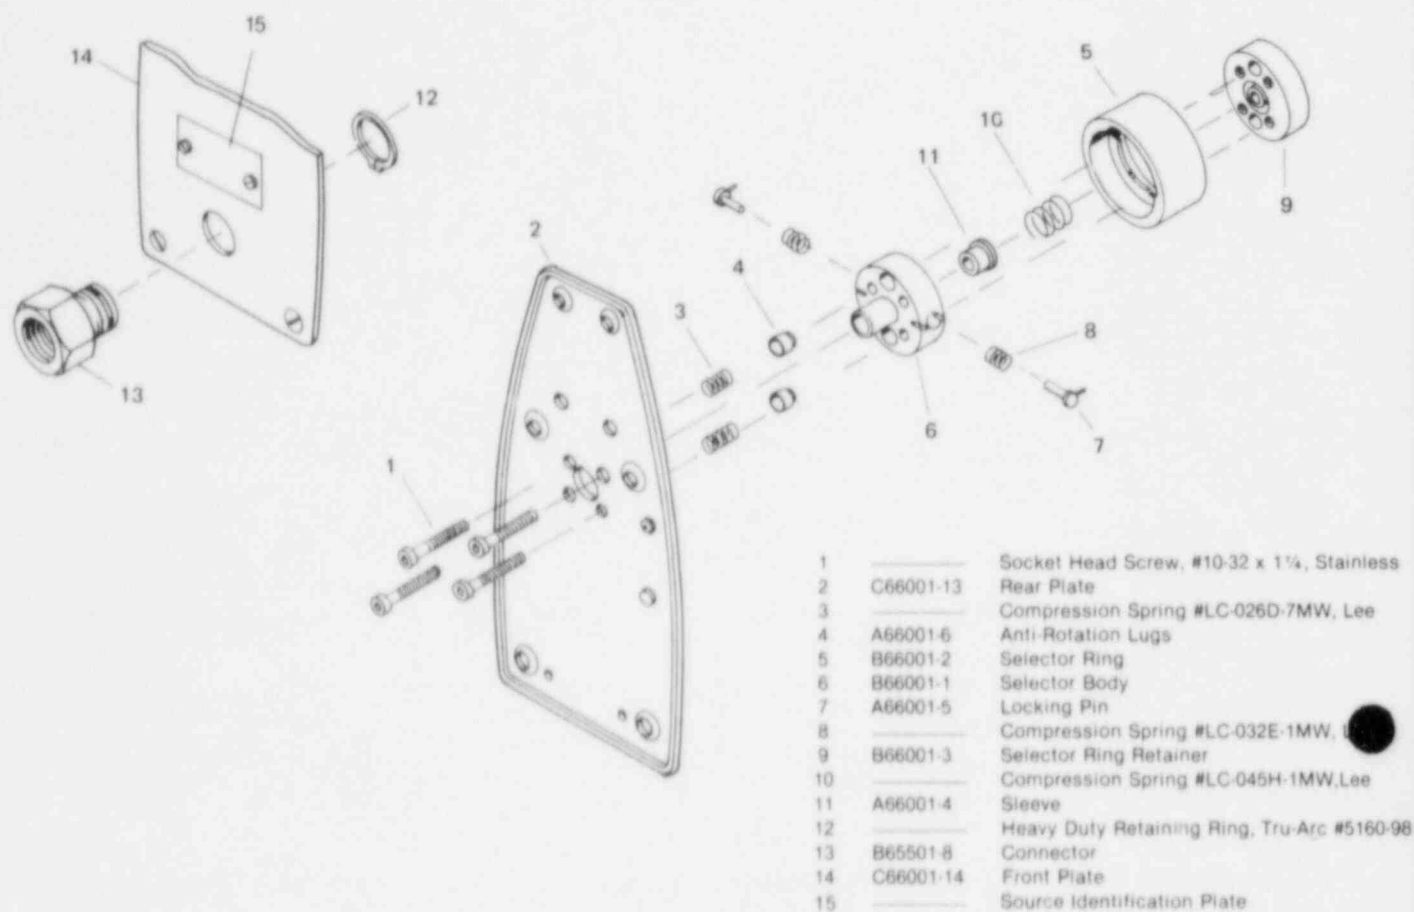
Rear End Plate and Control Unit Connector—Exploded View
